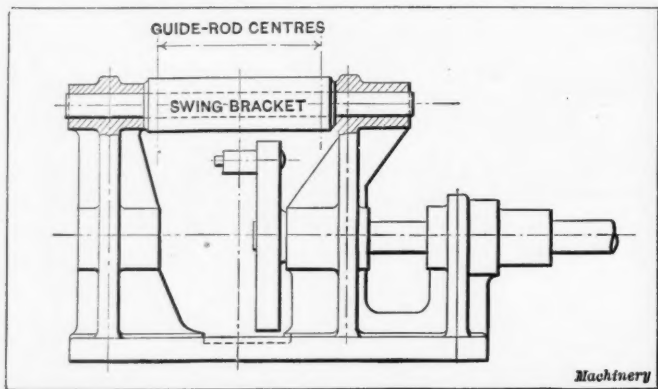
Arrangement of Bearings for Guide Frame, viewed from the Back
